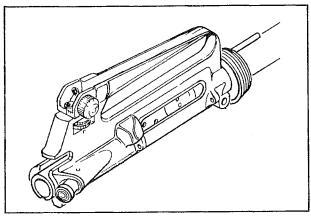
BARREL NUT AND GAS TUBE/FRONT SIGHT ASSEMBLY INSTALLATION
